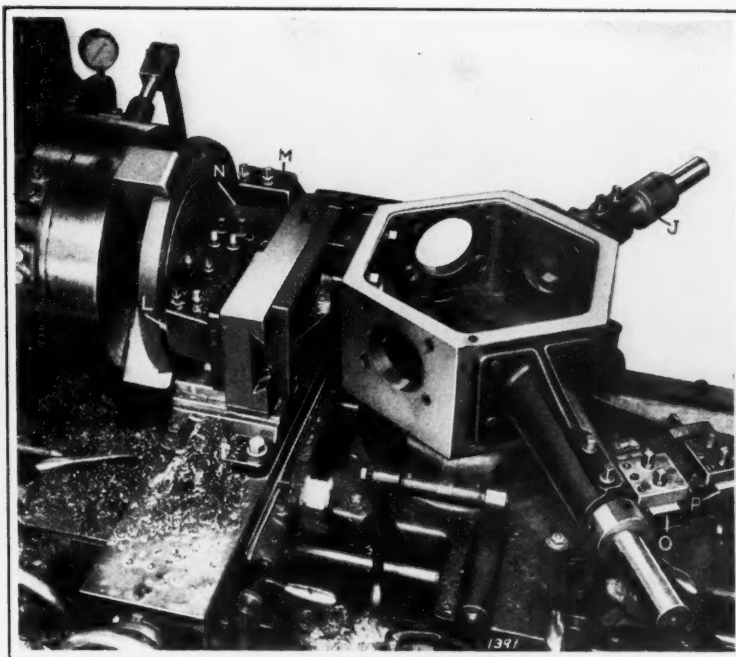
Machining Surfaces *A*, *B*, *C*, and *E*, Fig. 1, with Tools Held in Sliding Heads *K* and *M* Mounted on the Lathe Turret
